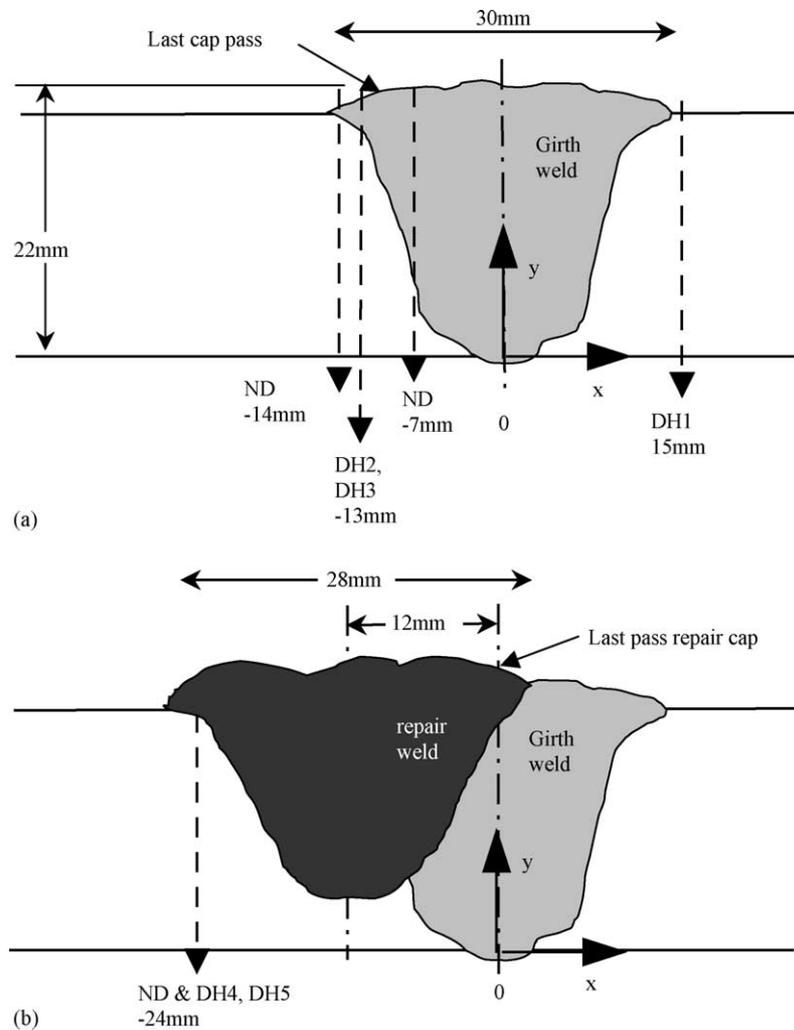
Positions of neutron diffraction and deep hole measurements: (a) in girth weld and (b) repair welds.
